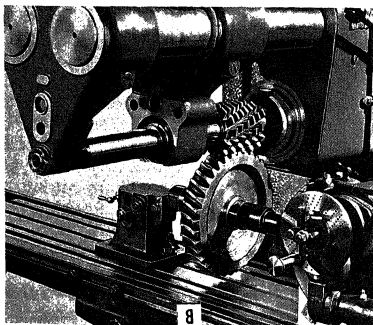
Milling machine set up for gashing and hobbing of a worm gear teeth
